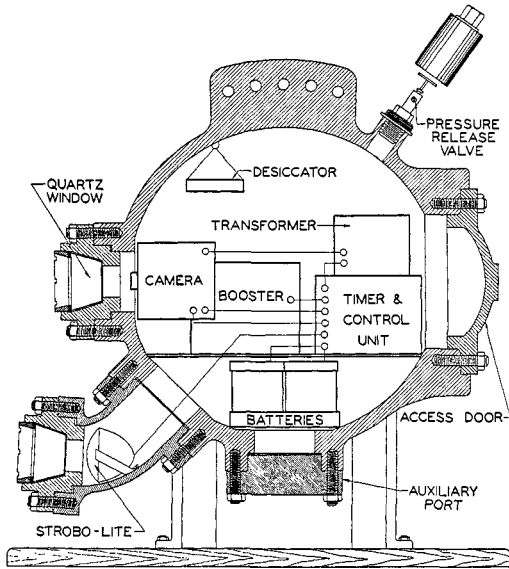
Cross-section of bathygraph showing construction details and equipment used for photography in the water.
